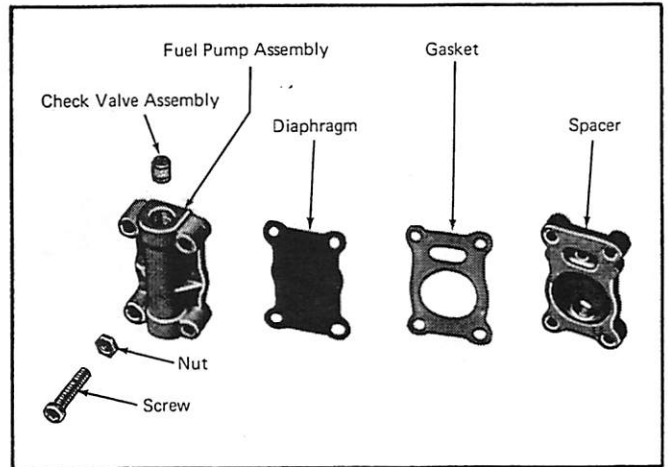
Fuel Pump A-39082A4 Type, Exploded View
